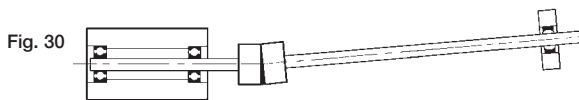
A semi-floating shaft located by a self-aligning bearing at one end should be supported with a single-stage coupler at the other.
